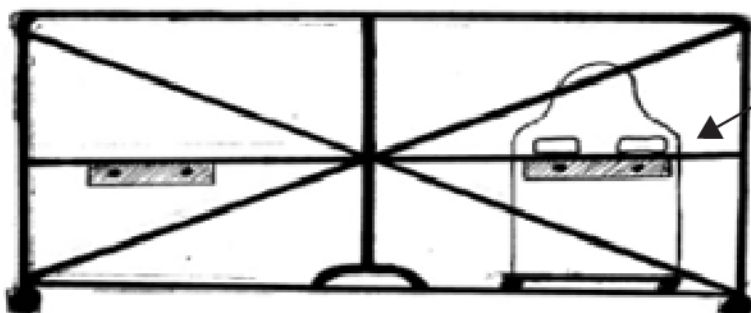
(Rear View) – Typical Roll Cage & Harness Mounting
